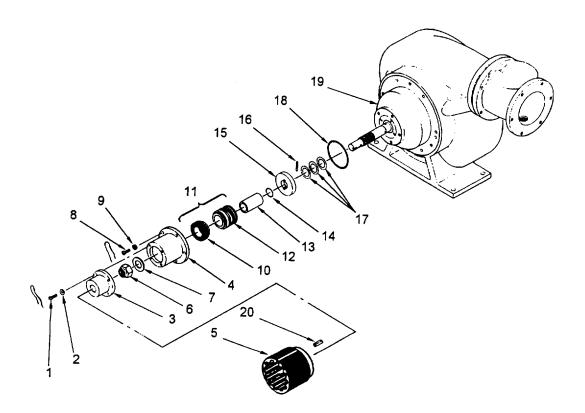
Shaft Seal Assembly/O-Ring Replacement
